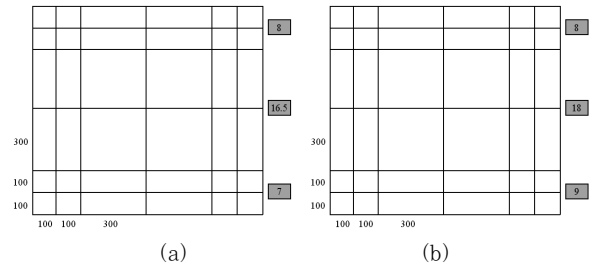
Transverse shrinkage of experimental model, in mm (a) front side 1 layer-welded specimen (b) back side 1 & 2 layer-welded specimen
